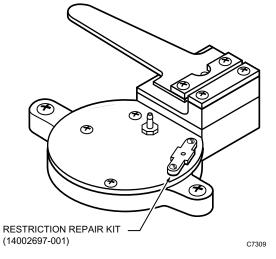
PP904A1035 Valve Assembly (14003348-002).
